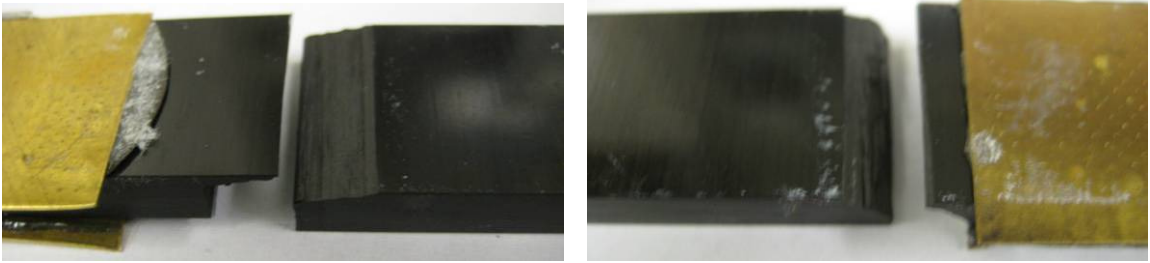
and b. The left and right “quarter-circle” fracture surfaces of Specimen 5, Group 3.
